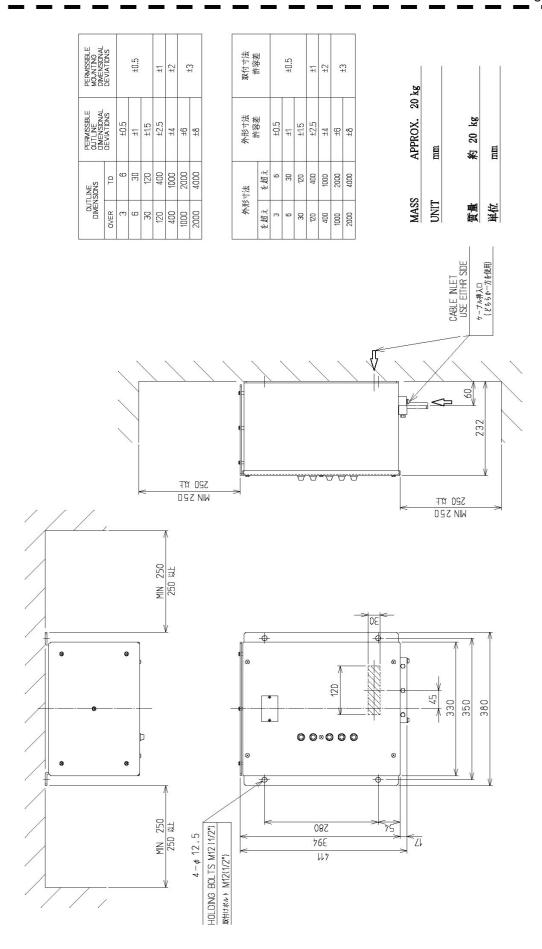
Outside Drawing of Power Unit, Type NBL-315
